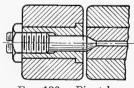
Pivot bearing with hardened conical-pointed pins.
